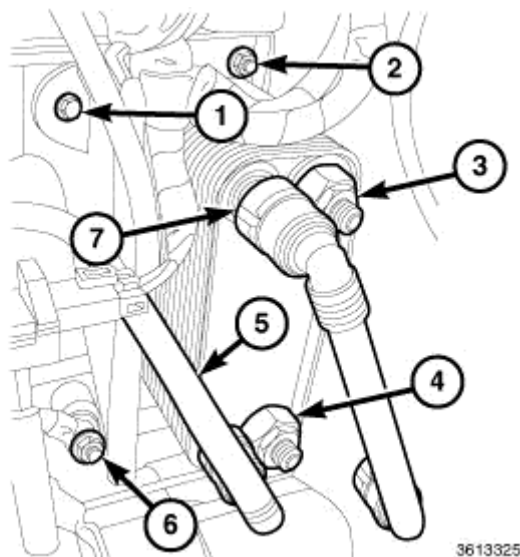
Transmission Oil Cooler - Diesel Engine
